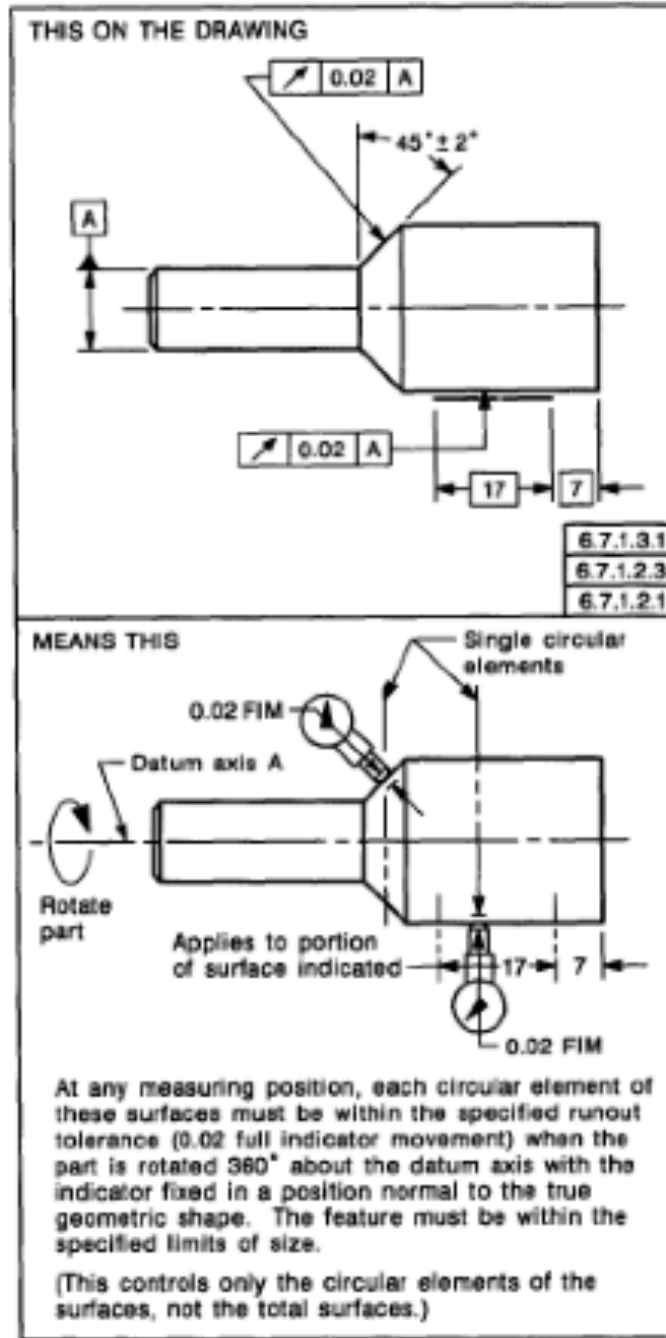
SPECIFYING CIRCULAR RUNOUT RELATIVE TO A DATUM DIAMETER
